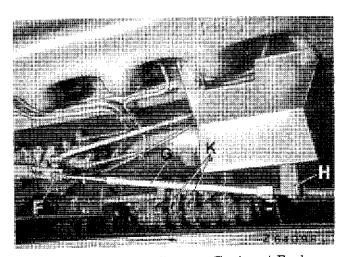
Preparing to Remove Engine at Fuel Injection Pump on 965 Combine
